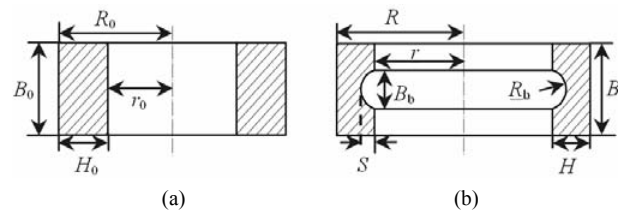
Ring blank and deformed ring of groove-section profile ring: (a) ring blank; (b) deformed ring.
